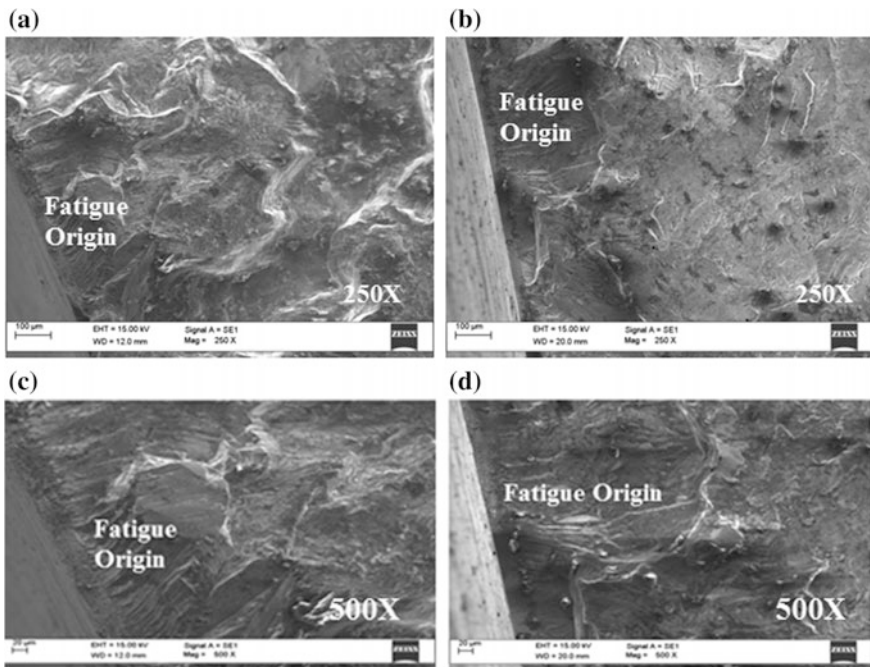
Fatigue origin in turbine blade of different machining processes a and c ECM and b and d CNC milling
